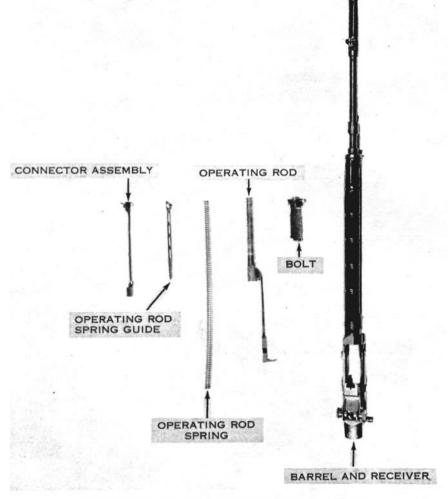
Parts of the barrel and receiver group in the order of disassembly.
